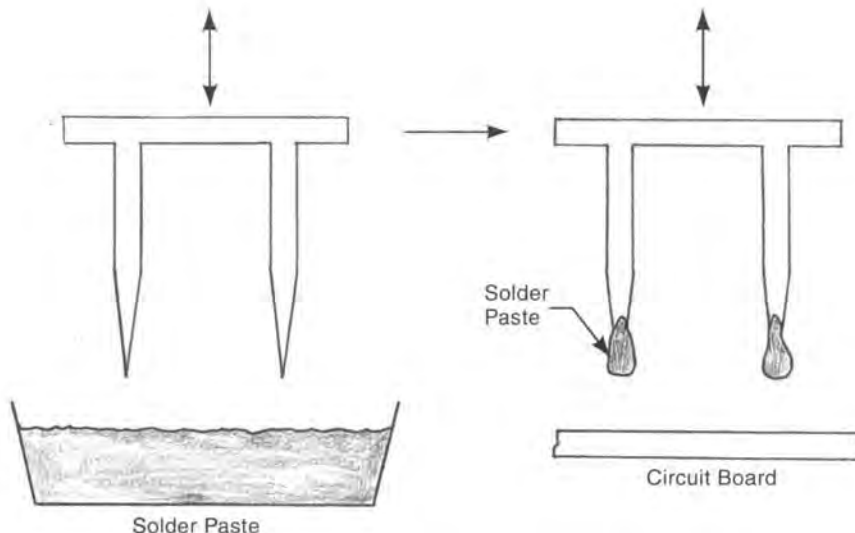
B2b2 A schematic representation of the pin transfer method of applying solder paste to the locations on a circuit board where solder connections are to be made. The pins, spaced exactly in the pattern of soldering pads on the board, are dipped together in a container of solder paste, picking up an amount on each pin end. When the pin ends touch the circuit board, the desired amount of solder paste is deposited on the board.
